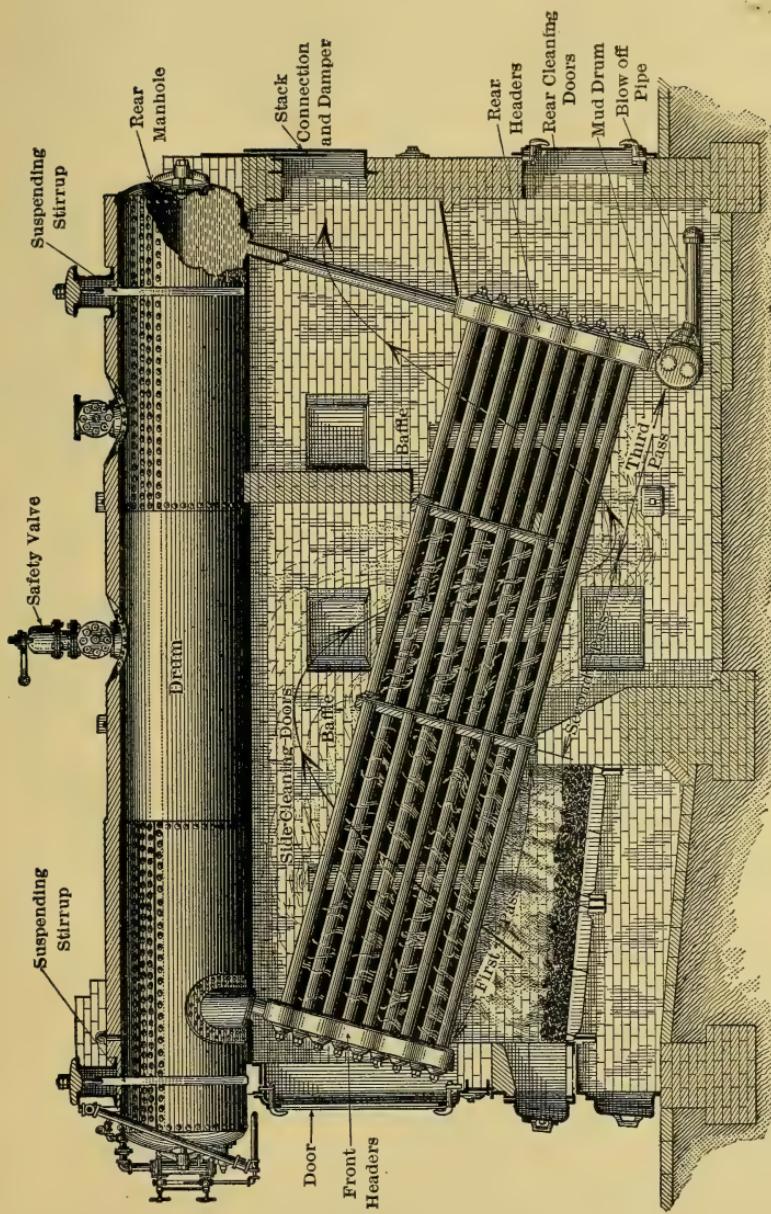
Babcock & Wilcox Water-tube Boiler.
